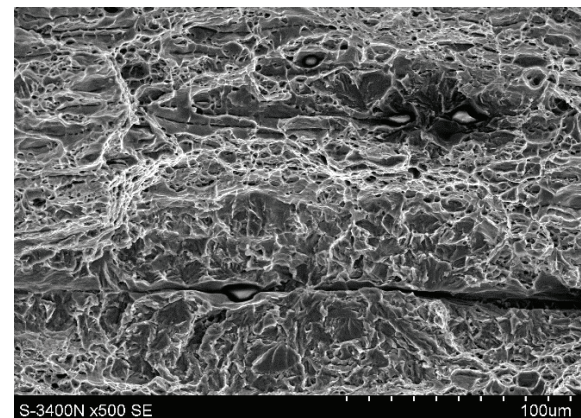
View of the fracture surfaces of samples of steel unhydrogenated and stretched.
